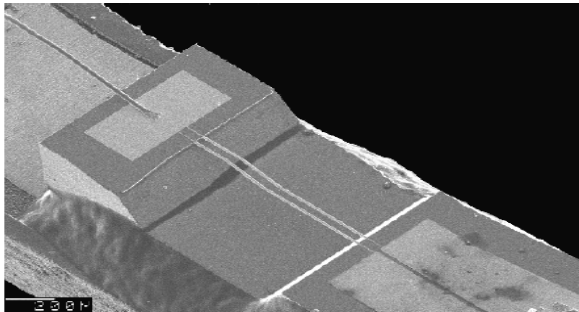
CONNECTED AND GLUED WIRES ON THE PRINTED CIRCUIT BOARD
